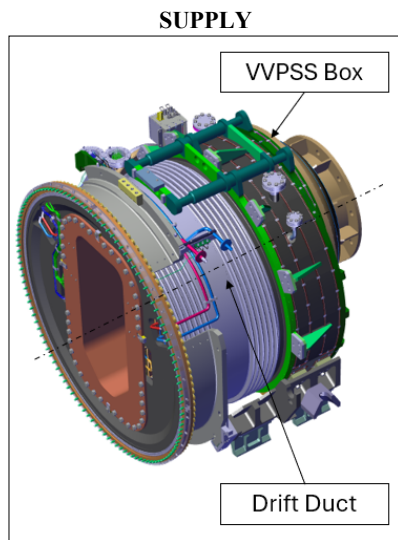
Batch VVPSS Box Welded to the Drift Duct
